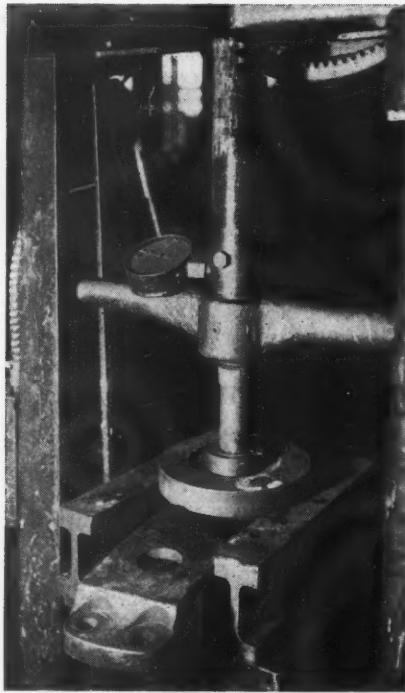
Pressing a Walschert link trunnion pin out of the sleeve. Besides the press, the only tools required are a split bushing and a circular plate which is counterbored to fit the bushing.
